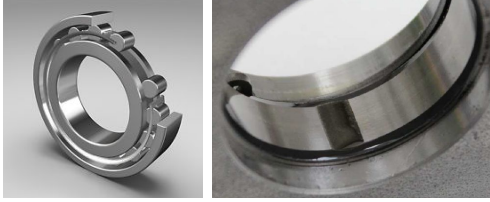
Cylindrical-roller bearing (left) and bearing damage in outer race (right)
